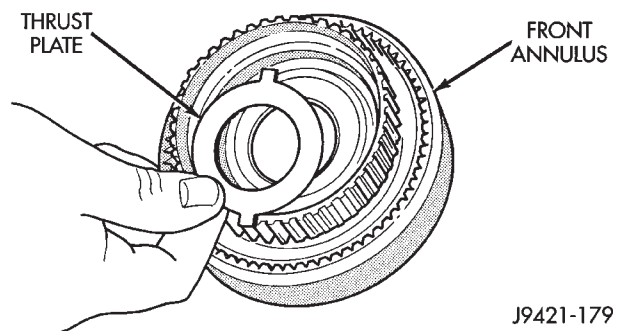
Positioning Thrust Plate On Front Annulus Support
